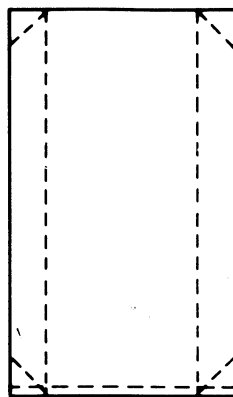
Open-mouth heat sealed gusseted sack with corner seals
